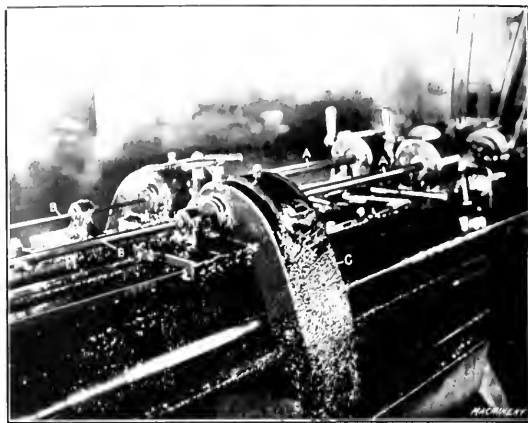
Detailed View of Pratt & Whitney Rifle Barrel Drilling Machine
